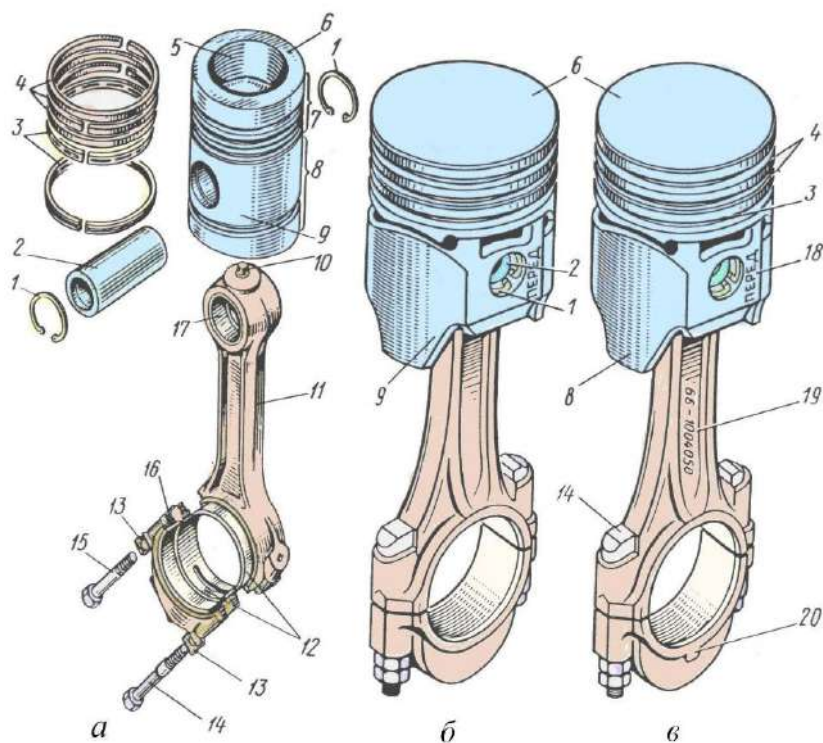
Connecting rod and piston groups of parts of the crankshaft of various internal combustion engines:
